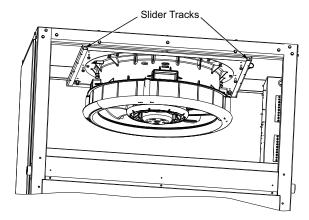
Lower Fan Deck Assembly to Slider Tracks
